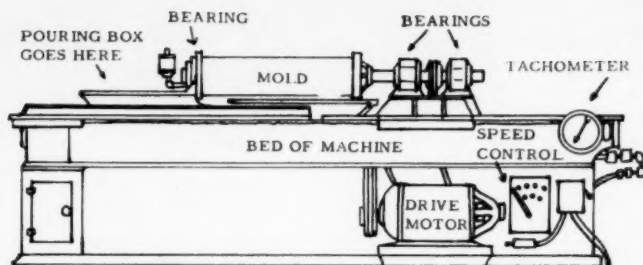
Sketch of horizontal experimental centrifugal casting machine.
